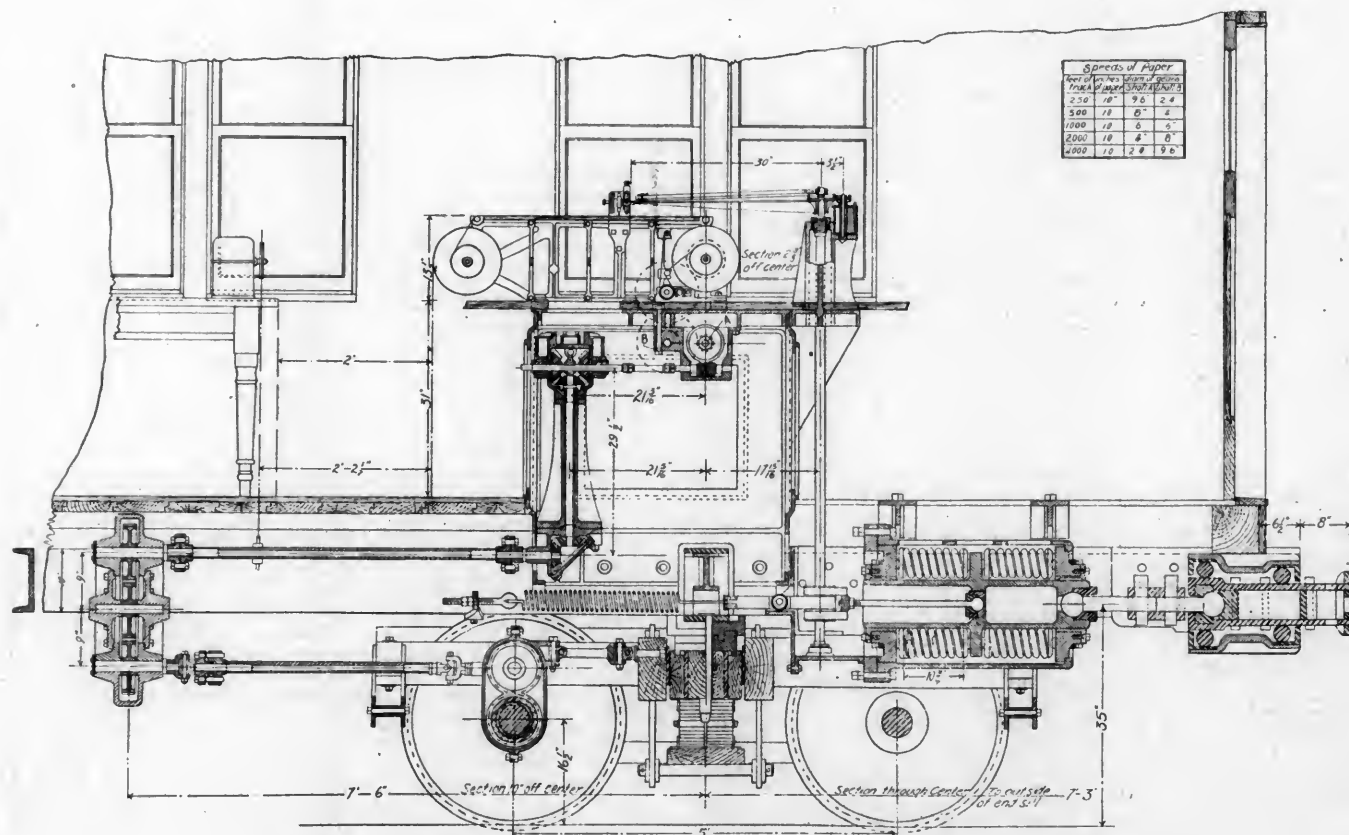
Draft Gear, Connection to Pencil and Train of Driving Gearing.
